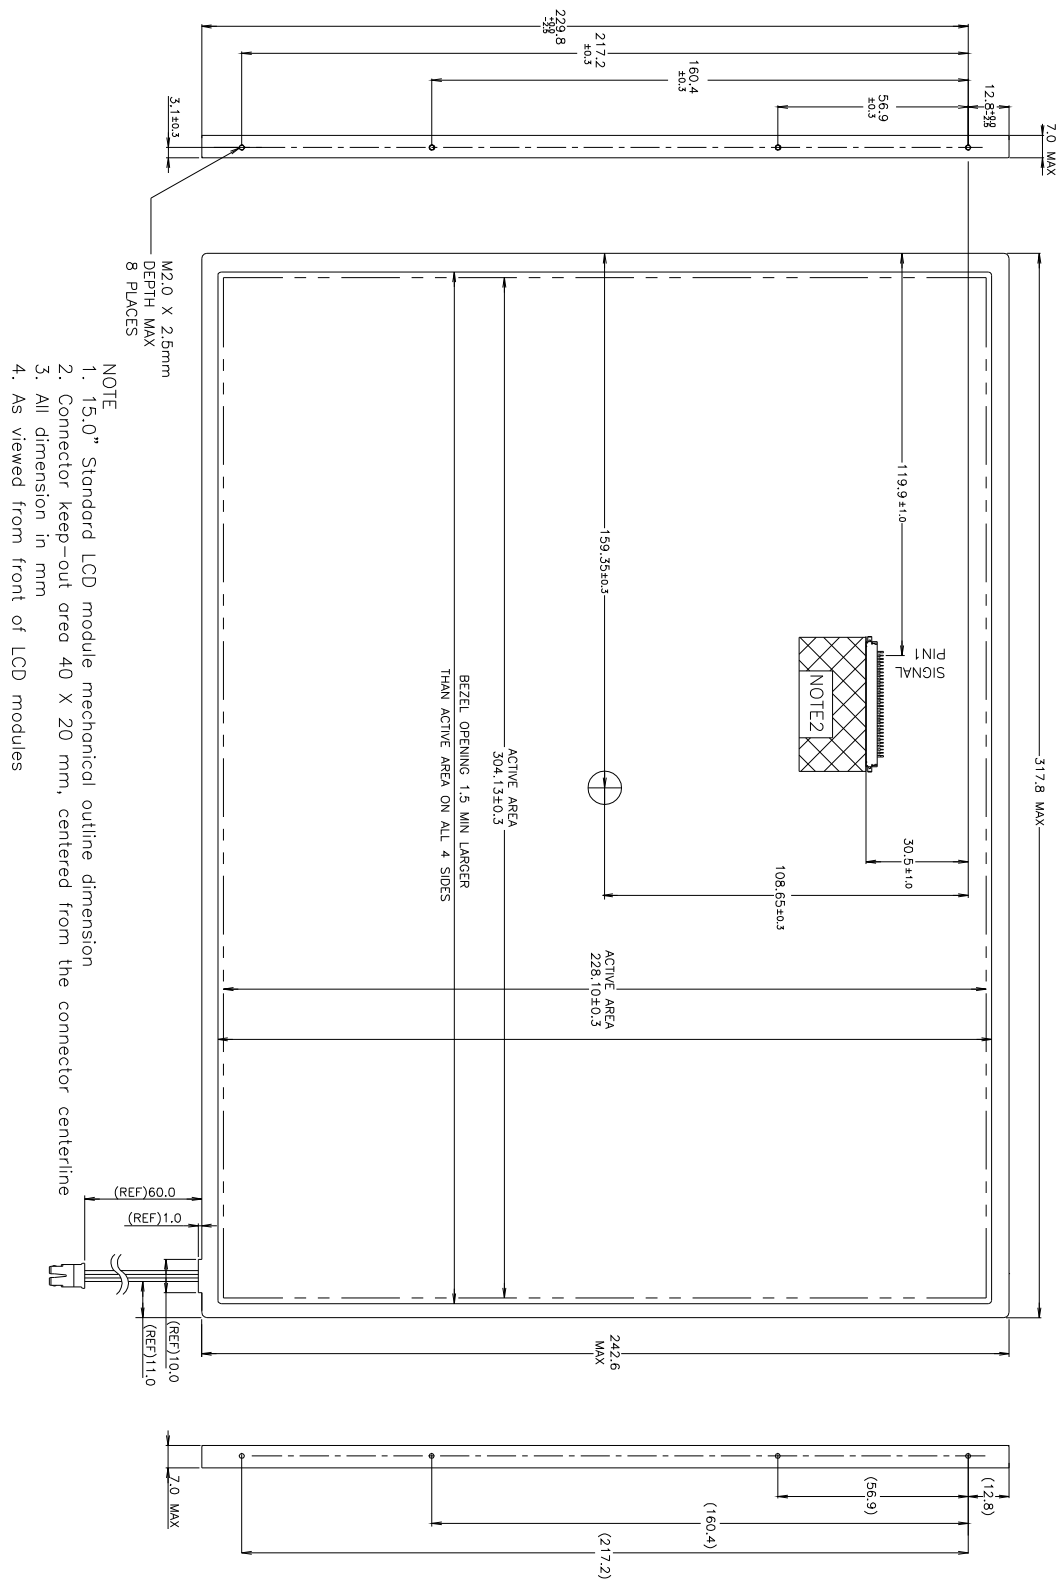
15-inch Standard Single CCFL Mechanical Outline Dimension (Front View)
